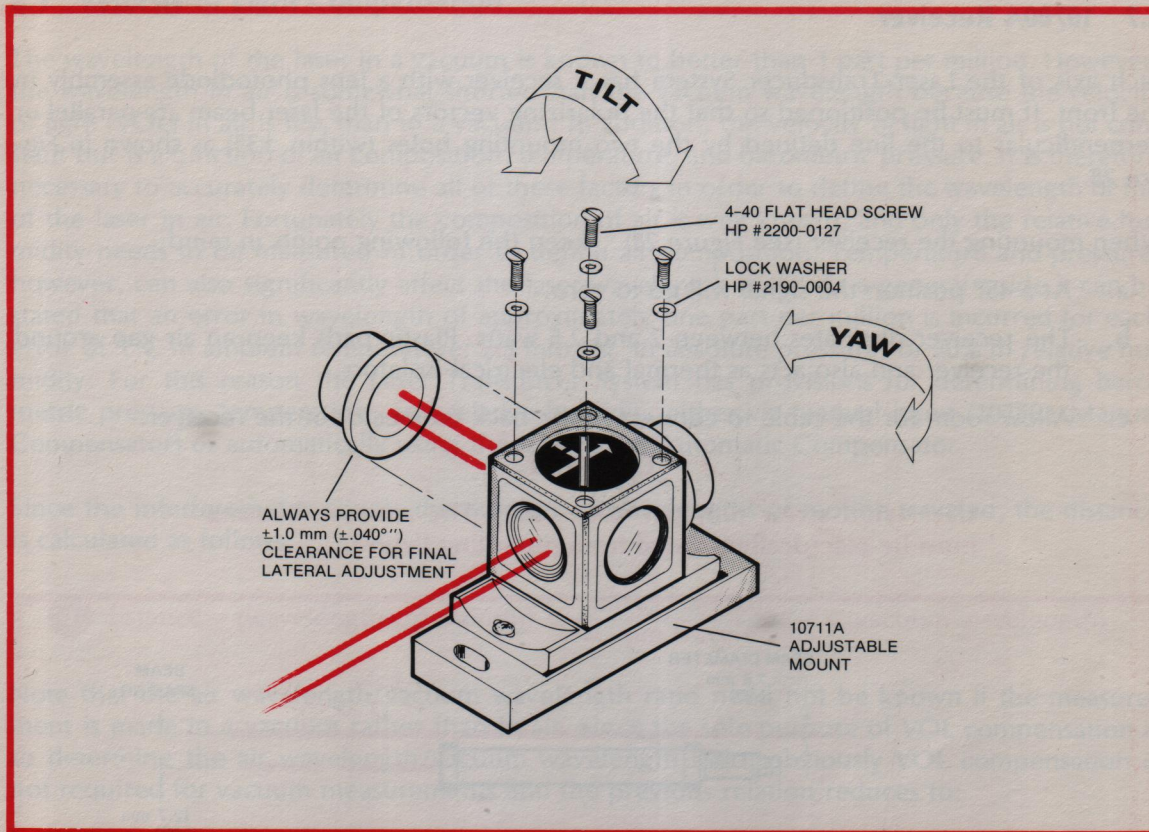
Horizontal Plane Mounting Using the 10711A Adjustable Mount
